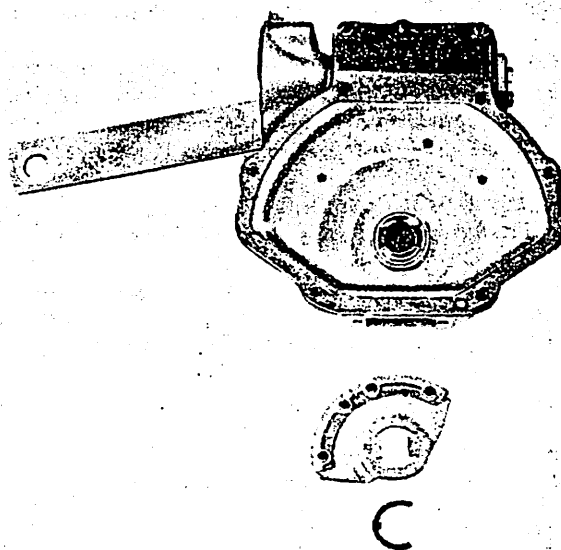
ACTUATOR WITH CONTACT SEGMENT REMOVED
